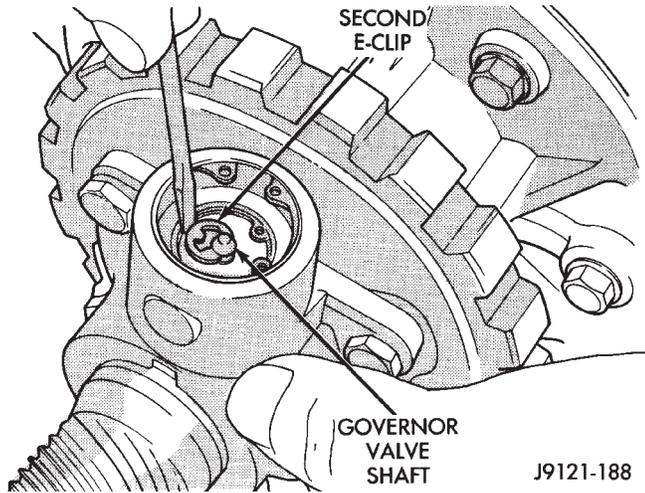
Securing Governor Valve Shaft With New E-Clip
